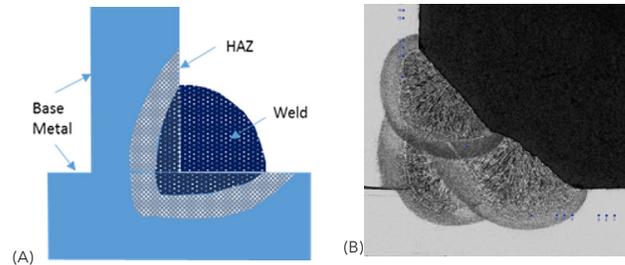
(a) is a schematic illustration of a weld, heat affected zone and base metal and (b) shows a fillet weld with three weld passes on a low alloy steel substrate etched using 2% Nital to reveal the weld, heat affected zones and the three weld passes making up the weld
